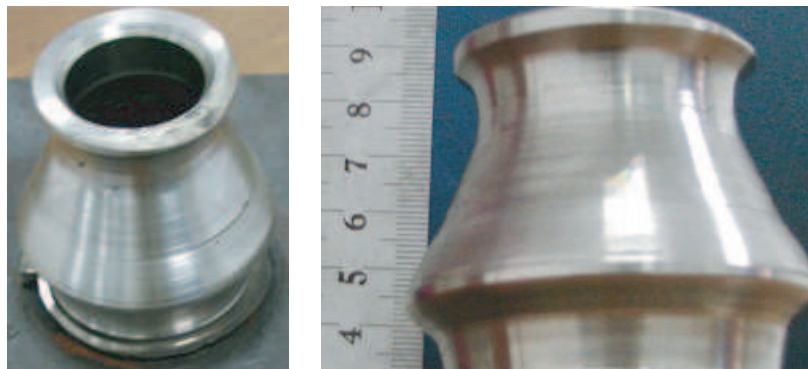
The thin wall sample trial manufactured by electromagnetic-compressed plasma deposition manufacturing.
